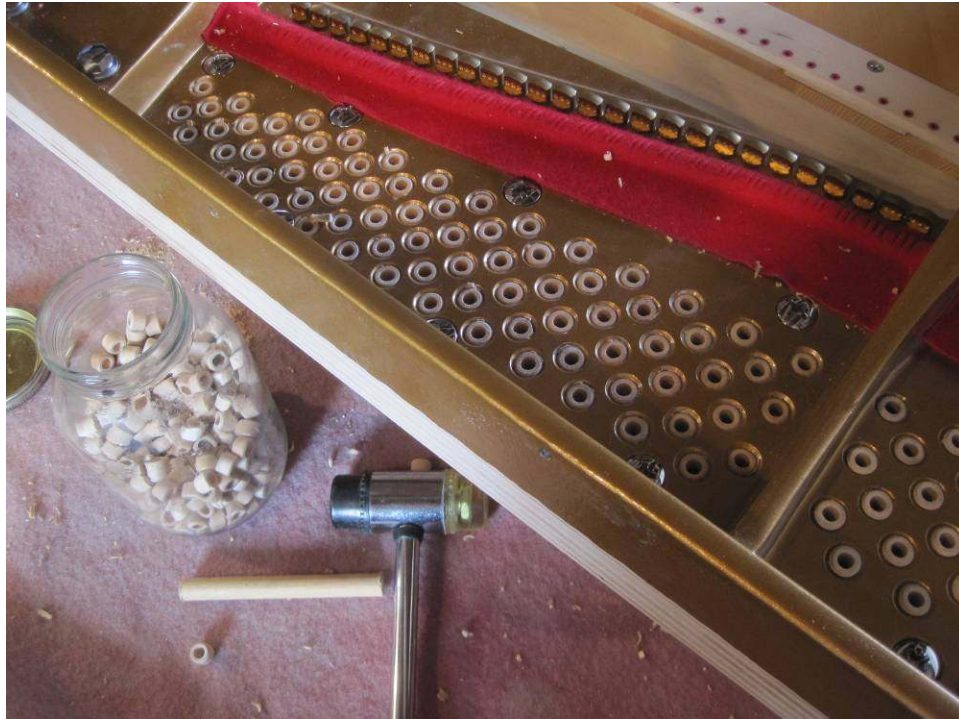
Bushings in place. The center holes for the pin are intentionally too small. If the holes were drilled at the size needed for the pins, the bushing would be too thin and fragile to pound into place.
